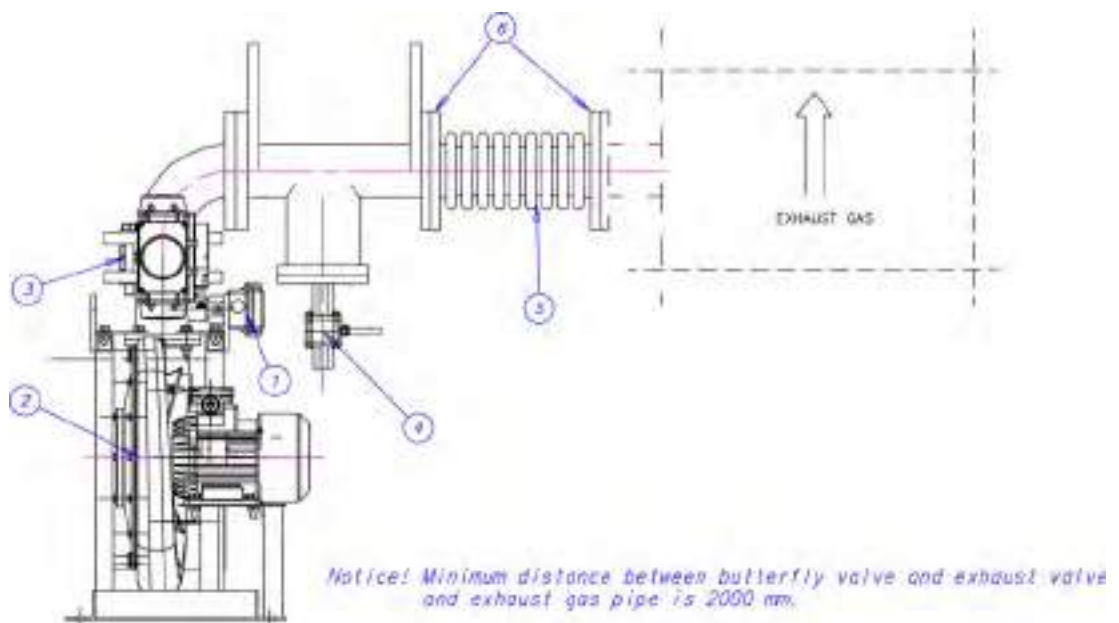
Exhaust gas ventilation arrangement (DAAF315146A)
